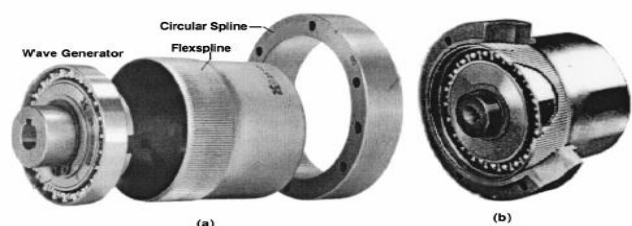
(a) Exploded and (b) Assembled view of Harmonic Drive
